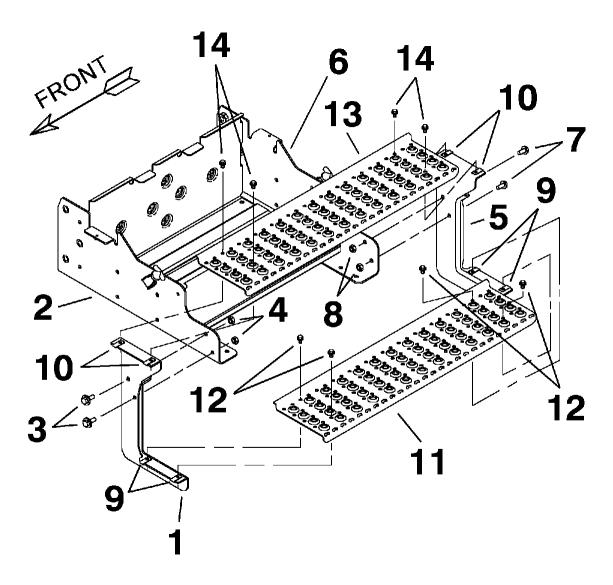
Installing Two Step Mounting Brackets, U-nuts and Upper and Lower Steps
